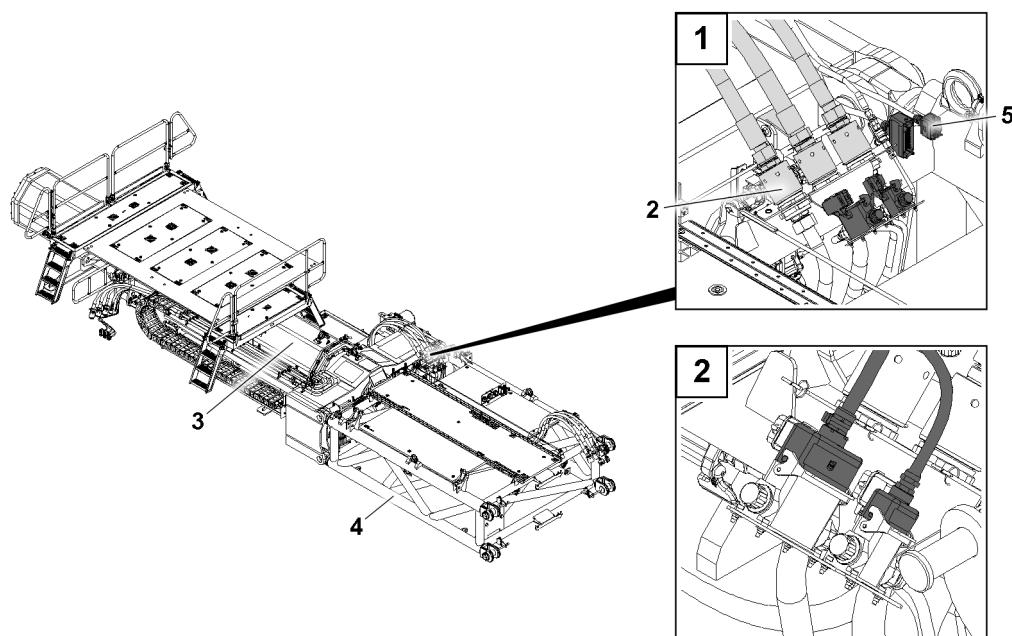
Disconnecting the electrical and hydraulic connections between the intermediate section and the ballast trailer guide
